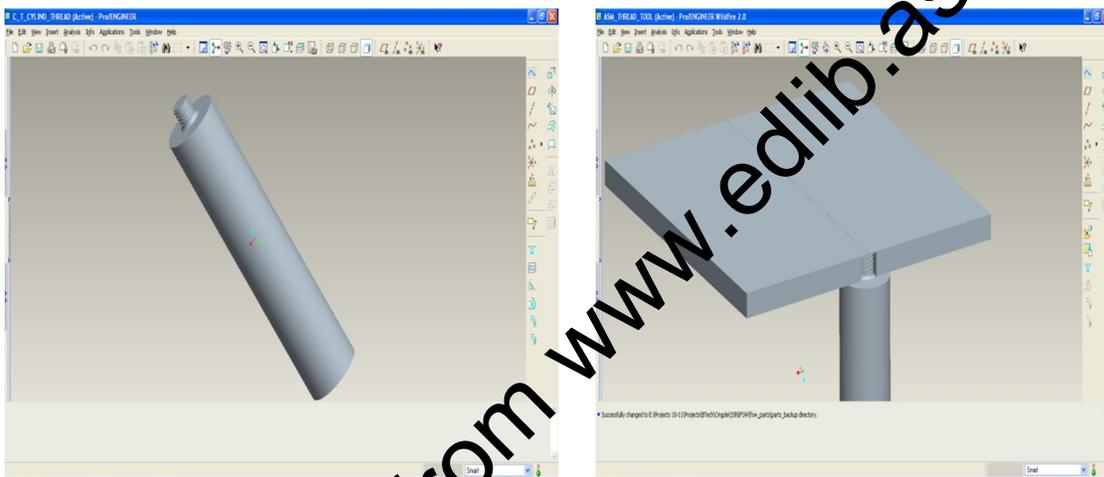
Threaded Tool and plates for friction stir welding
